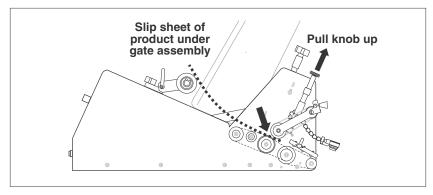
Lifting Gate Assembly Upward to Insert Material
